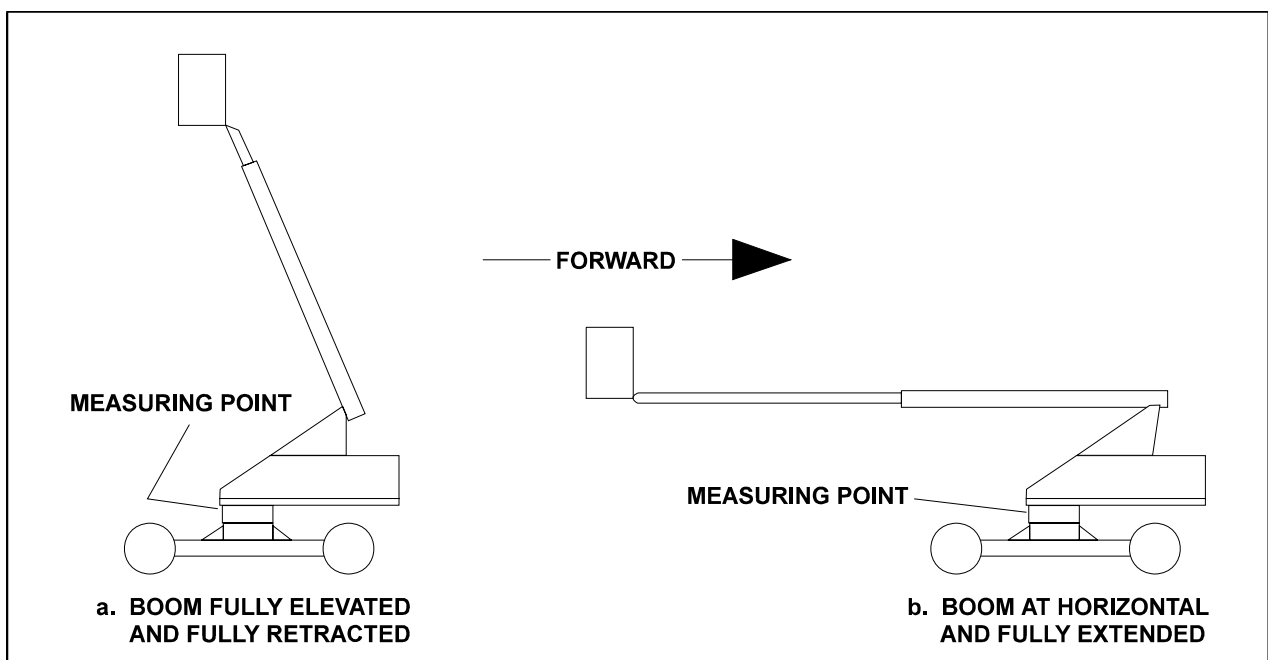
Swing Bearing Tolerance Boom Placement
